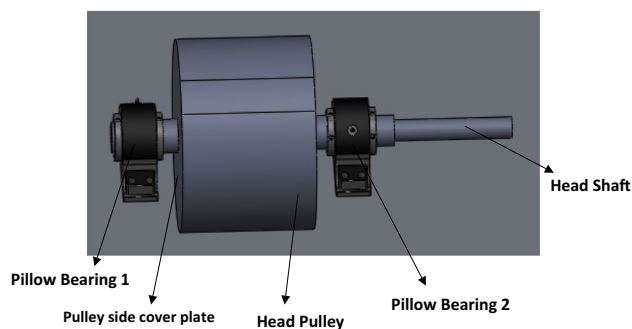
Mechanical model of the elevator head shaft with pulley and its bearing support.
